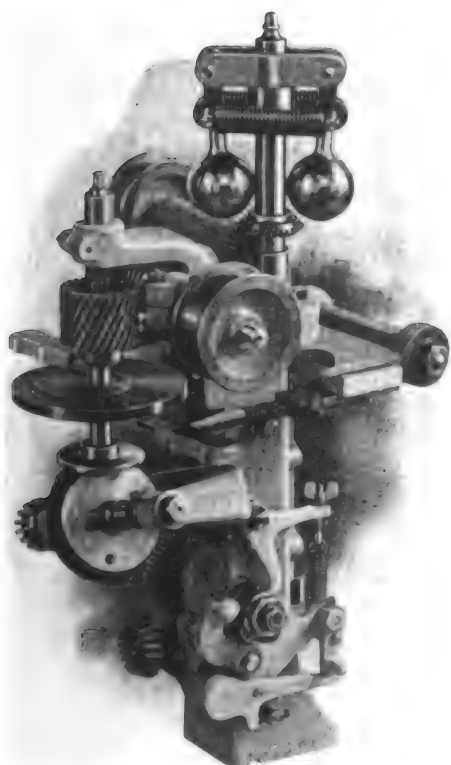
WOODWARD CONTROLLING MECHANISM.
